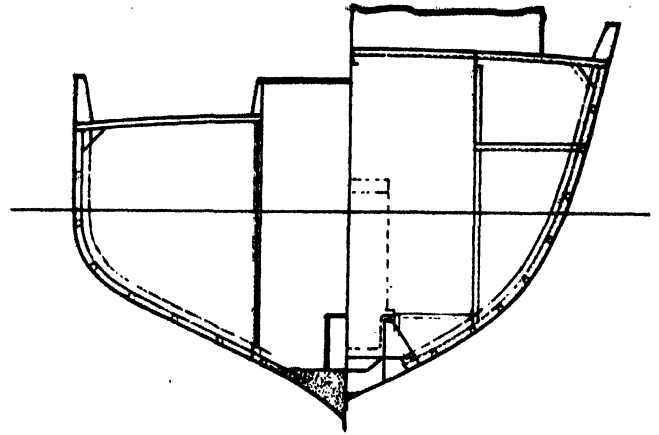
83×22 ft. (25.3×6.7 m.) welded steel round-bottom combination vessel
